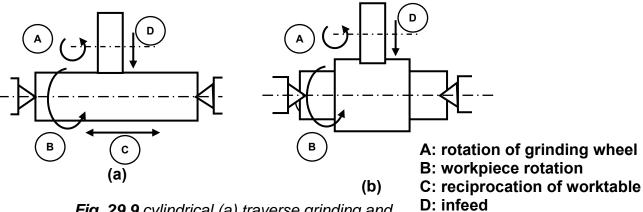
cylindrical (a) traverse grinding and (b) plunge grinding
